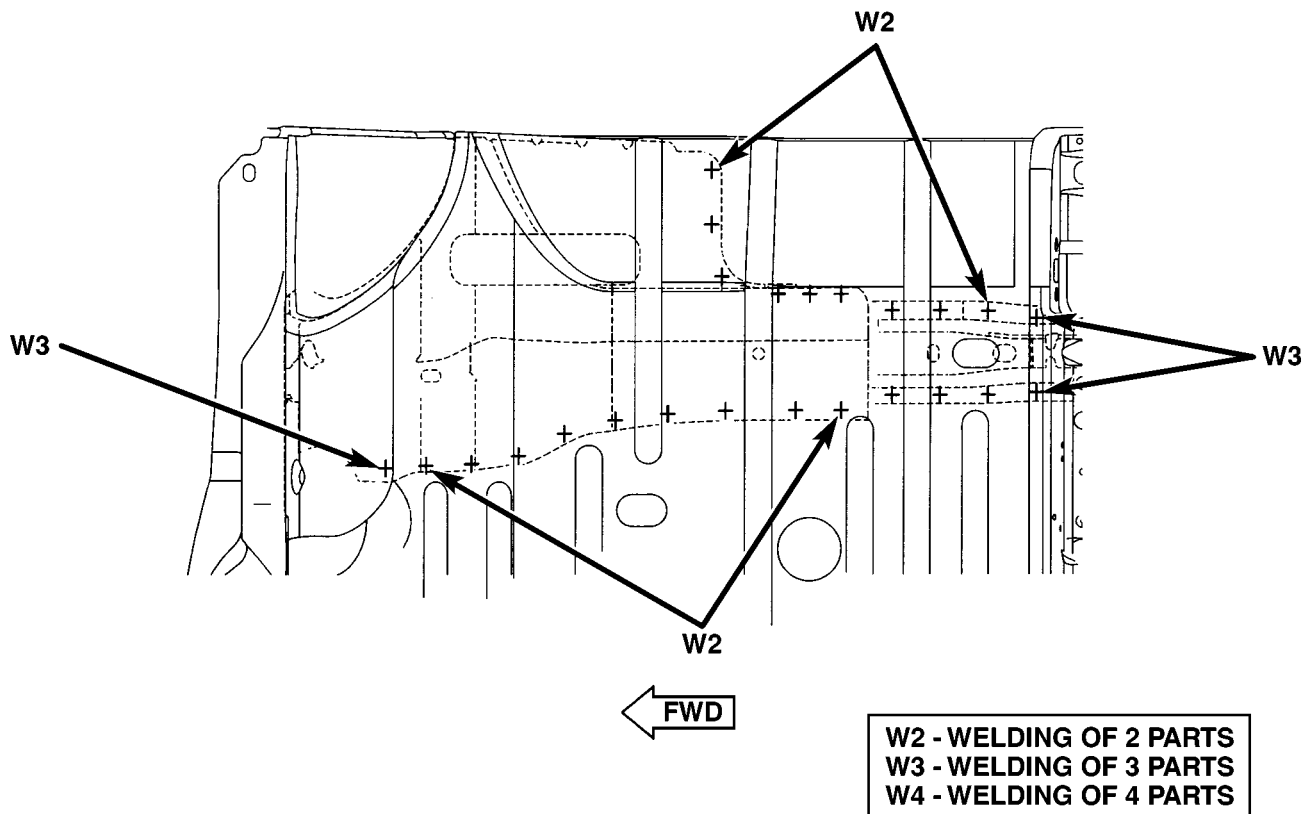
FRONT SIDE RAIL & REAR CAP TO FRONT FLOOR PAN
